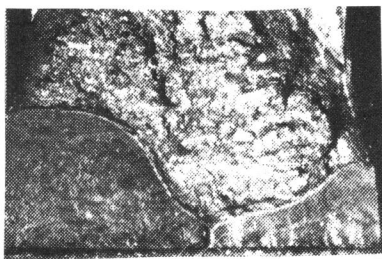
The bi-modal fatigue crack front development of the 10 mm thick CT specimen due to the welding residual stresses.
